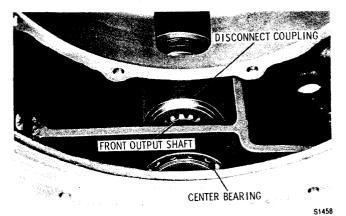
Disconnect coupling, front output shaft, and center bearing (-1 models with output disconnect)
